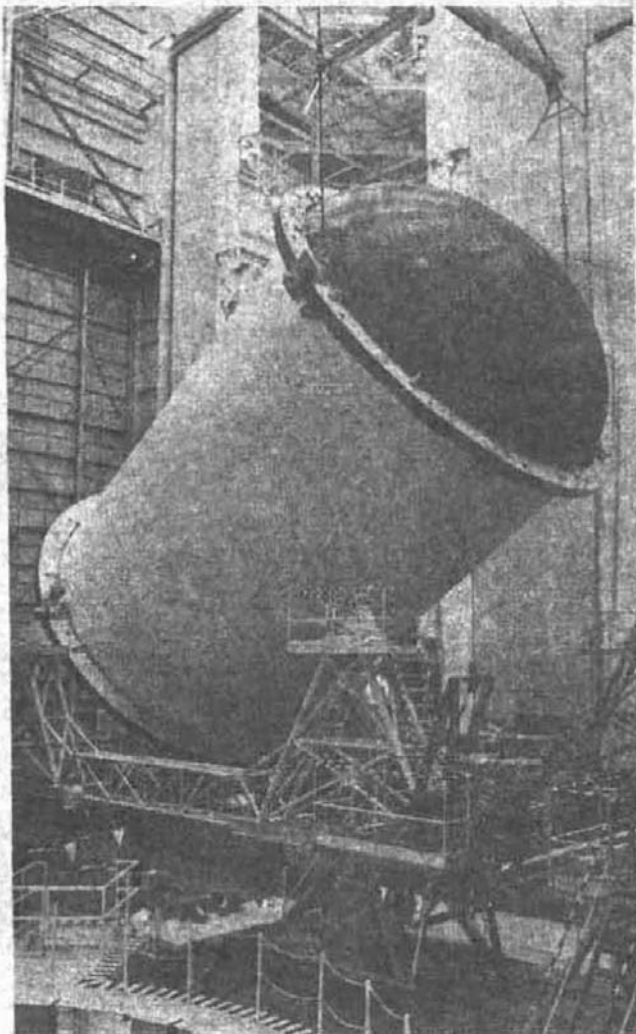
LIFTING OF S-IC-D LOX TANK FOR INSTALLATION INTO VERTICAL TOWER
